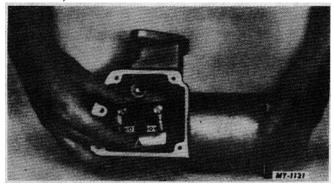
Removing Automatic Switch From Housing INSPECTION AND REPAIR
